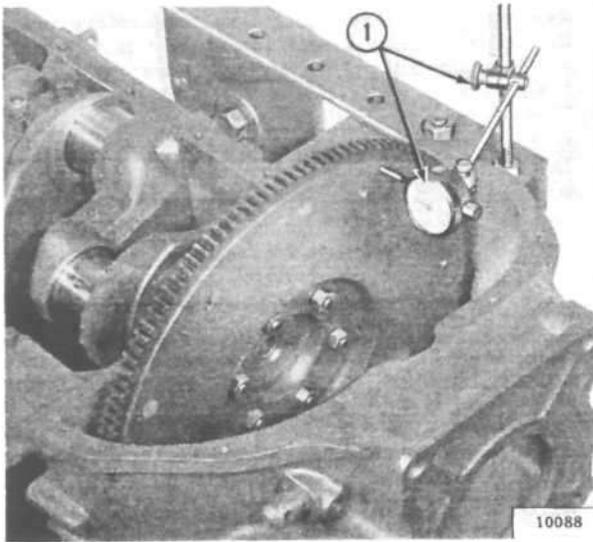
CHECKING FLYWHEEL RUN-OUT
